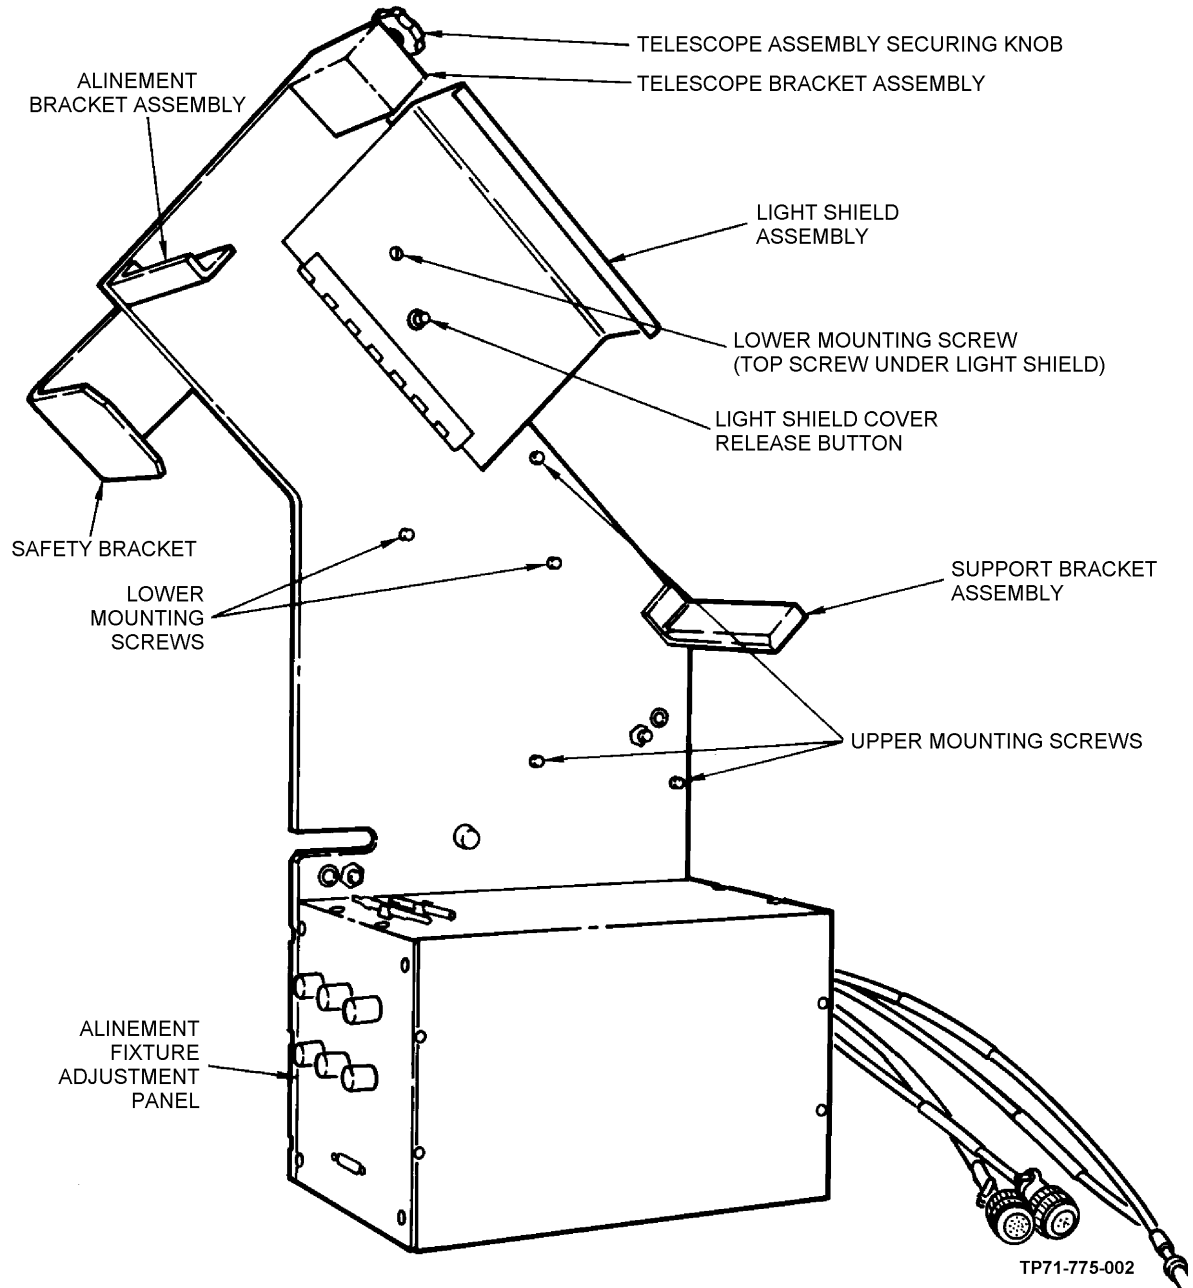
Optical Alinement Assembly (Without Power Pod Installed)
